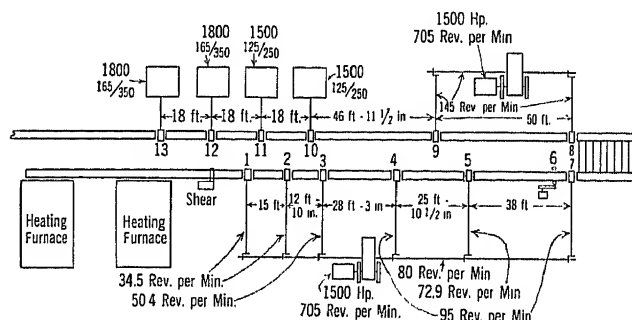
20-IN.—16-IN. SEMI-CONTINUOUS STRIP MILL AT WEST LEECHBURG STEEL COMPANY
